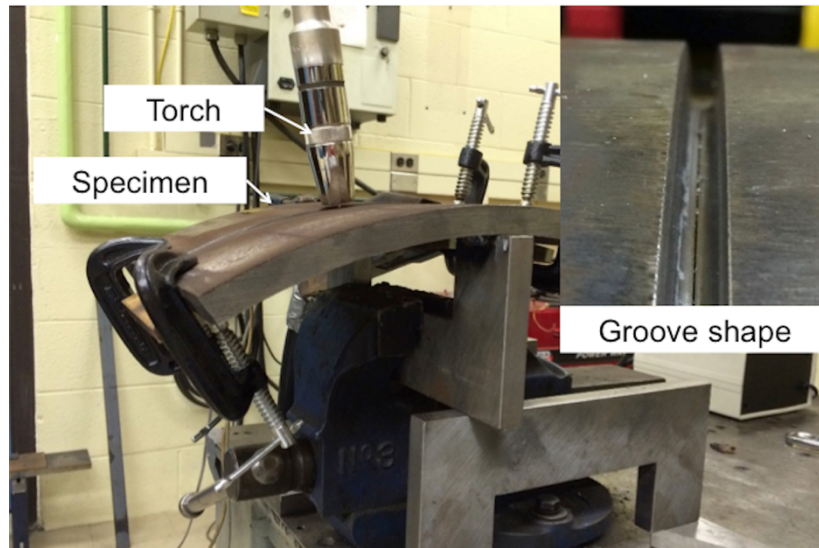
Layout of fixtures for robotic welding of pipe segment
